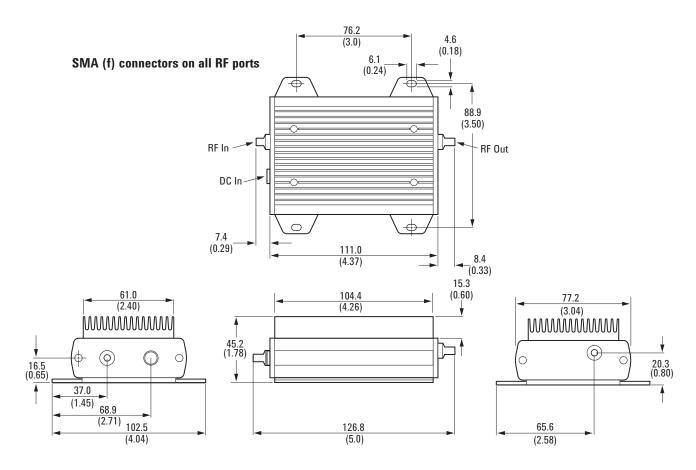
Agilent 87415A outline drawing. Dimensions in millimeters and (inches).
